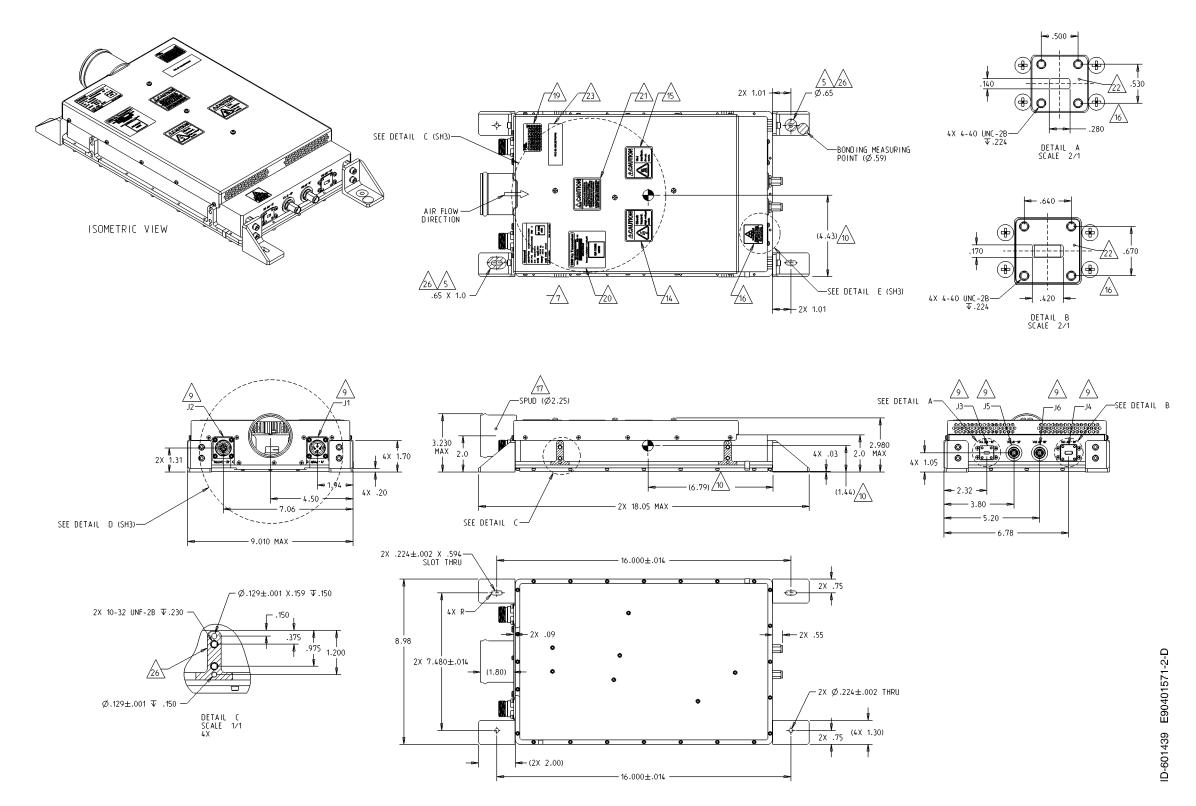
(Sheet 2 of 3) KRFU, Forced Air Cooled, Outline and Installation Drawing (90401571, REV D)
